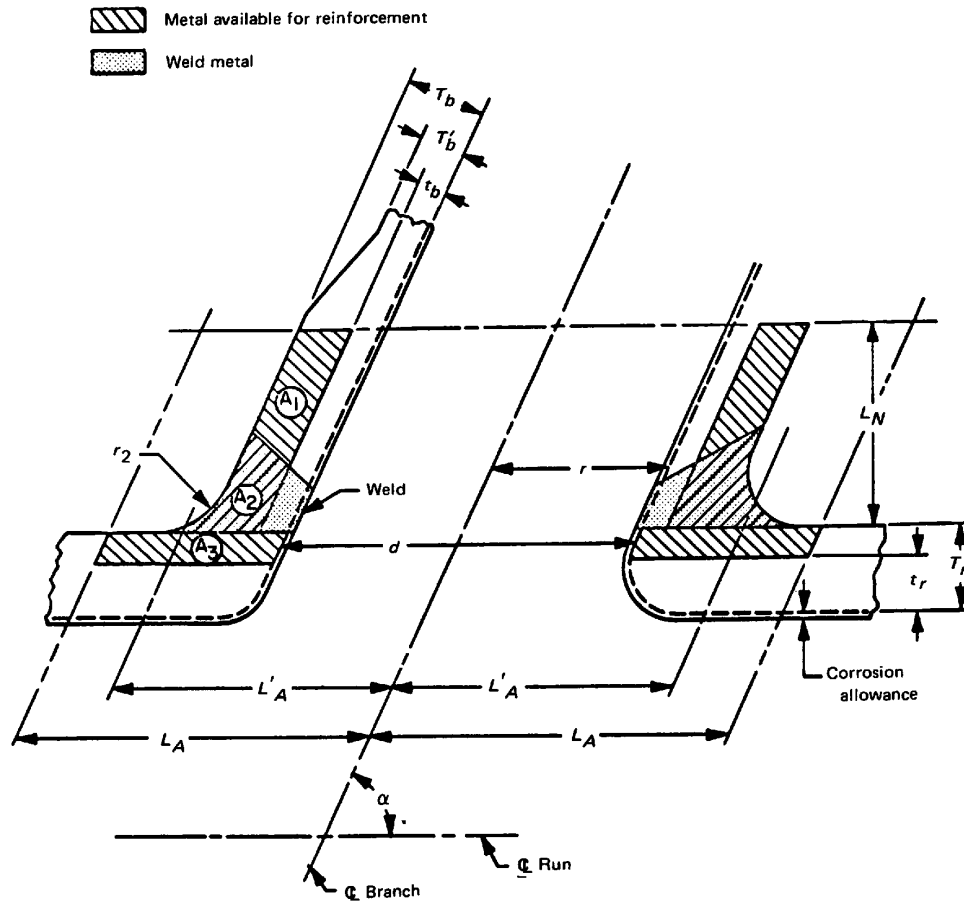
(a)-2 TYPICAL REINFORCEMENT OF OPENINGS
